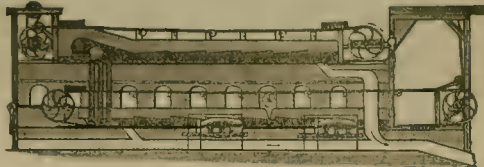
SECTIONAL SIDE ELEVATION OF FURNACE.
